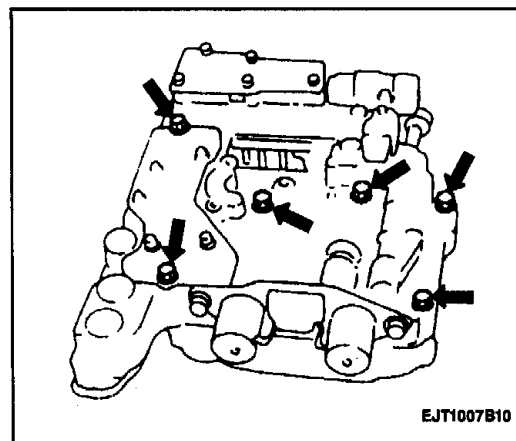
Lower Valve Body Bolt Location (03-72LE, 4-Speed)
